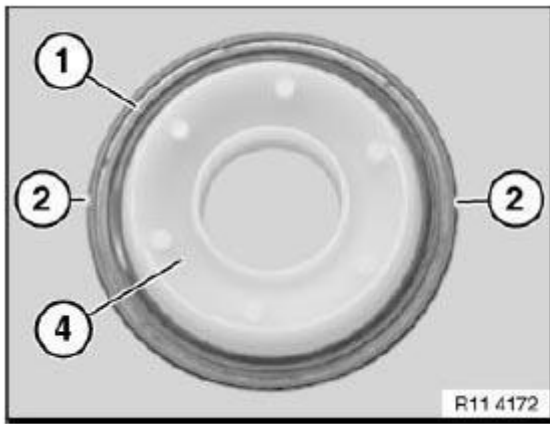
Identifying Radial Shaft Seal, Support Sleeve And Grooves
